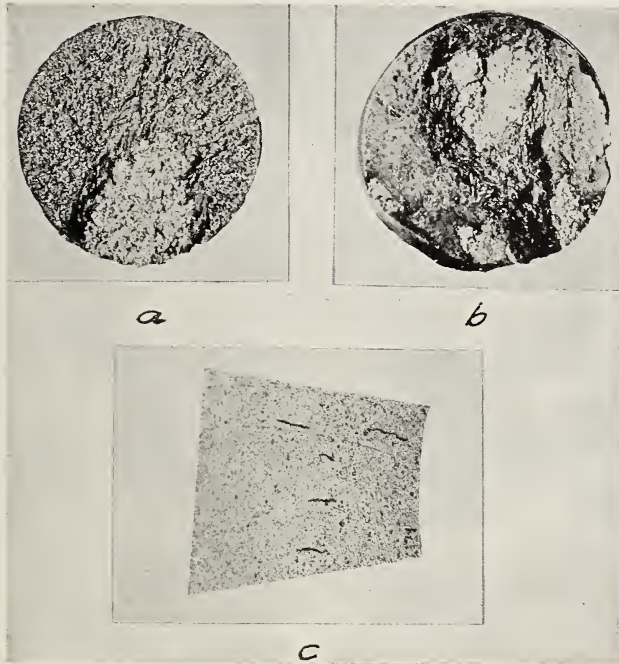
Characteristic appearance of "flakes" in gun steel revealed by tensile fractures and macroscopic appearance of flaky steel
